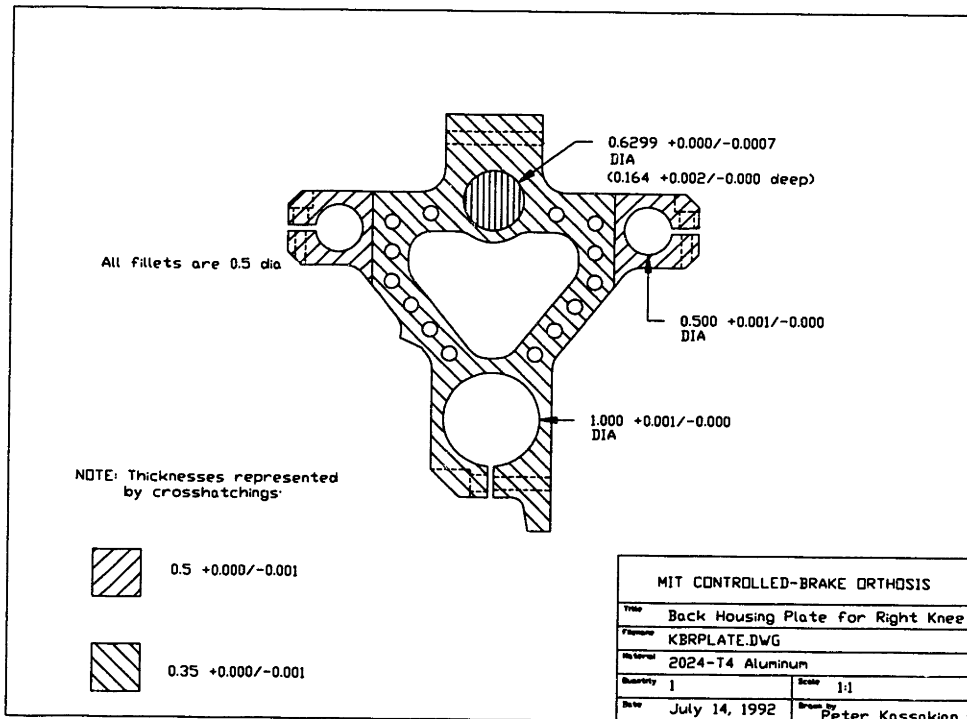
Back plate for right knee gear housing (drawing 1 of 2).
